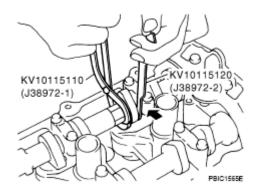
Placing Lifter Stopper Between Camshaft And Edge Of Valve Lifter
